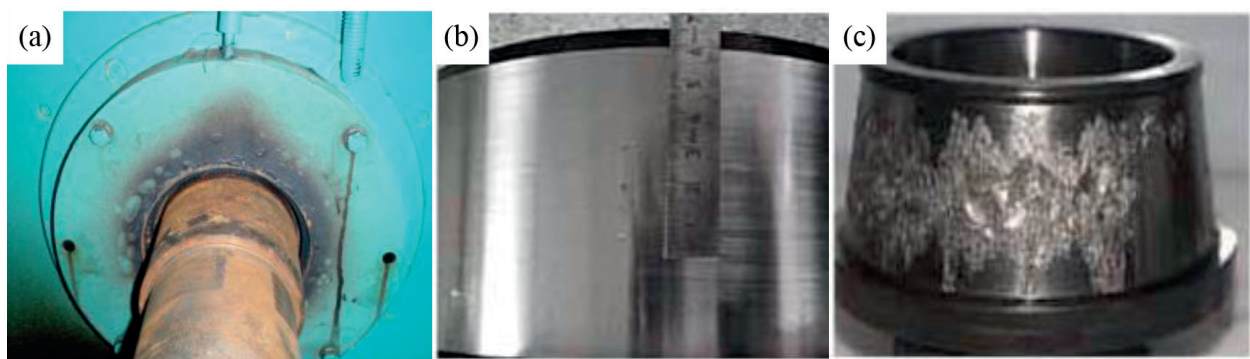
Bearings failure: (a) bearing in gearbox; (b) and (c) failure appearance of bearing.
